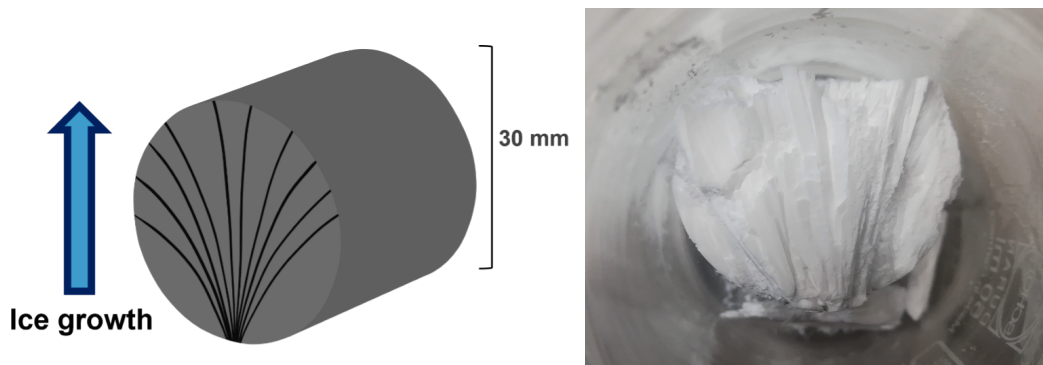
Channel alignment deviation in the 4-piece freeze-casting mould for scaled-up conditions, including the cross-section of a test freeze-cast alumina sample.
